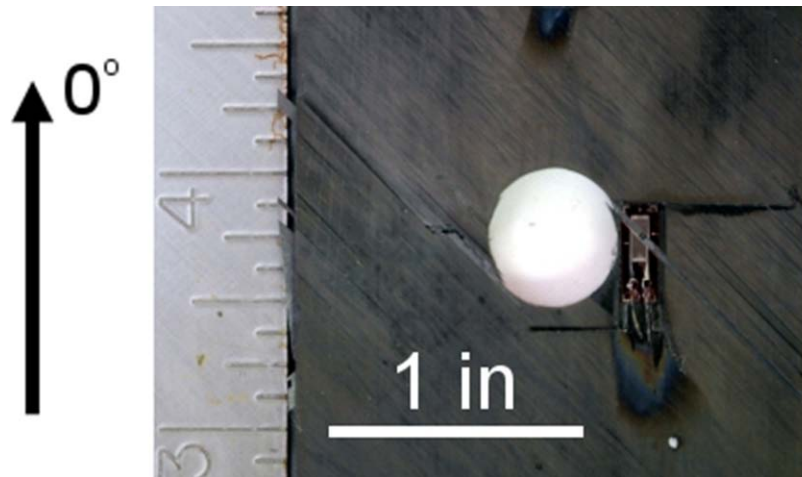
Photograph of a failed open-hole tension specimen (OH-A051-01), with hole diameter of 0.5 inches.
